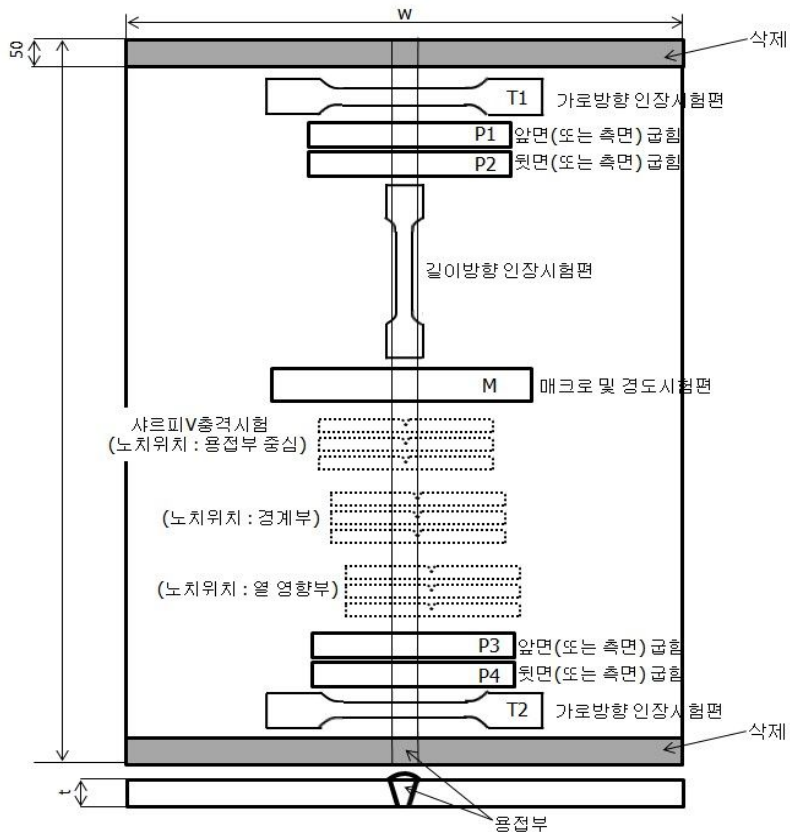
Configuration and dimension of test specimen (19mm)
